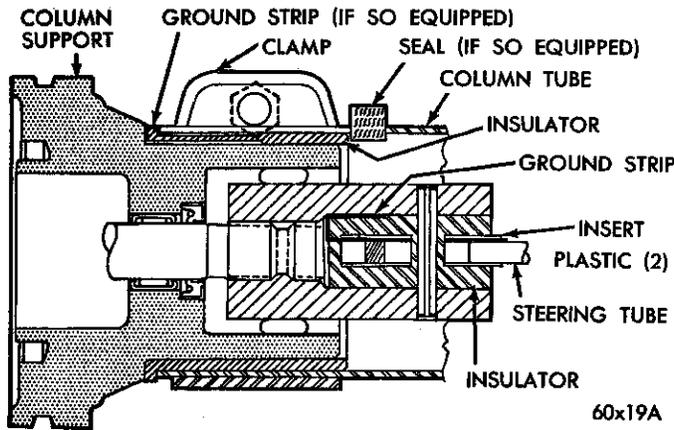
Jacket Tube Installed on Jacket Support—Cross Section
